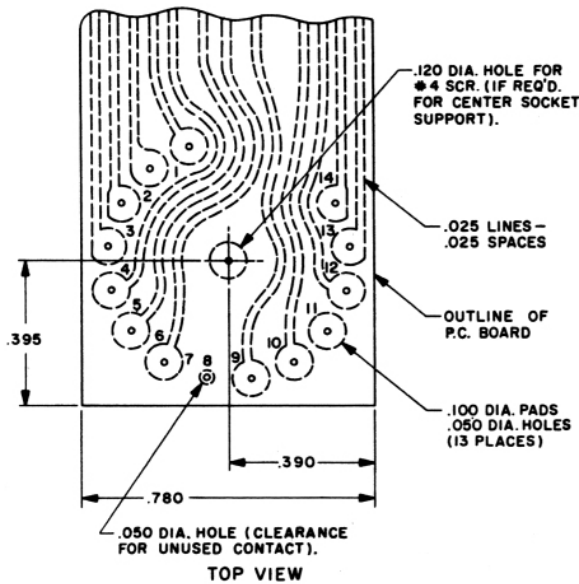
RECOMMENDED PRINTED CIRCUIT BOARD LAYOUT
